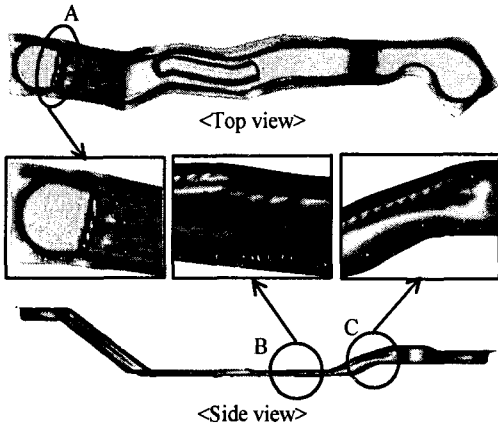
Wrinkling in welded blank hydroforming
